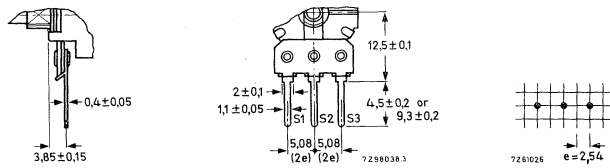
Long or short printed-wiring pins (single potentiometer).
